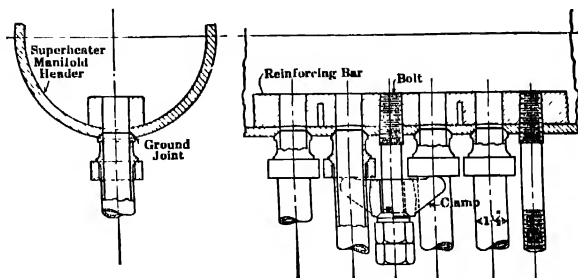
Method of Securing Tubes to Header — Elesco Superheater.
